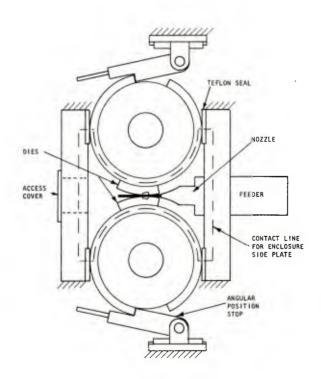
Schematic of Roll Forge Machine Showing Angular Position Stops and Workpiece Feeder Arrangement for Root Forging Operation.
